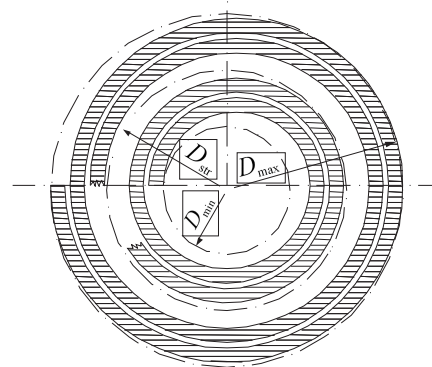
The axial cross-sectional foil coil with m parallel windings.
